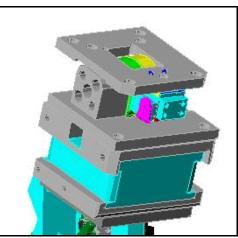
Neck Pitch Change Mechanism assembled to Upper Flex Joint
